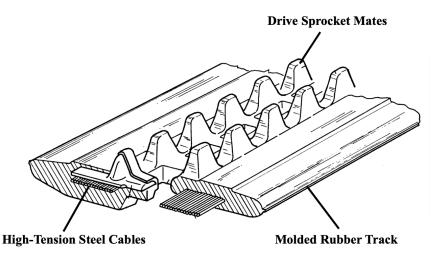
Cross section of molded track with embedded cables, adapted from [102].
